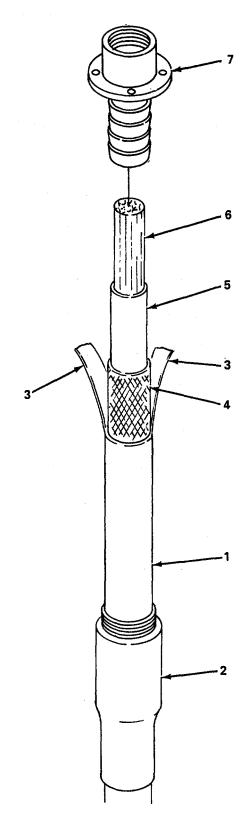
Communications Cable, Fabrication (Sheet 1 of 6).
